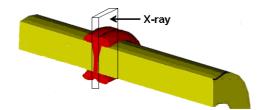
Scheme of the welded joint of PP-80/PE-80 pipe types with position of a sample for X-ray study
